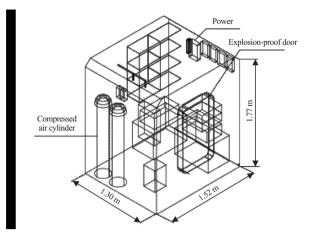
Internal layout and dimensions of the mine rescue relay cabin.
